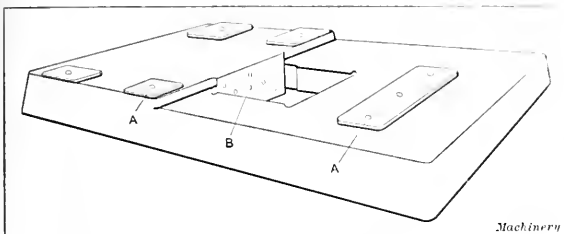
Sub-base of Machine which required Special Fixture for drilling Holes B
